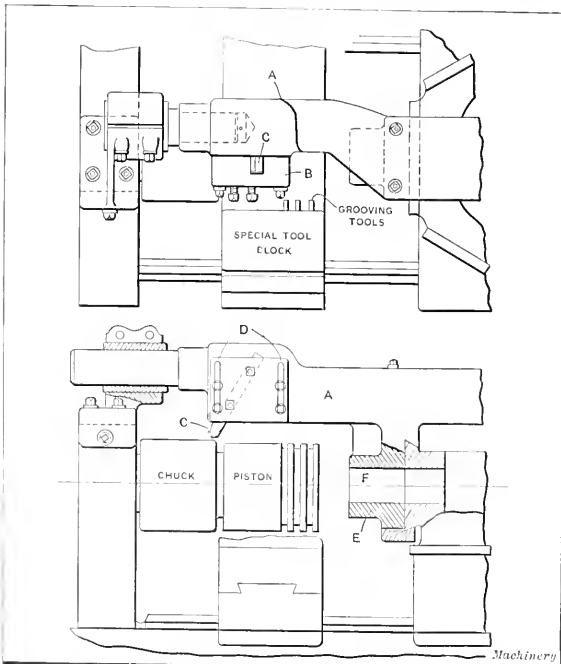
Piston Turning Tool having Adjustable Tool-block
